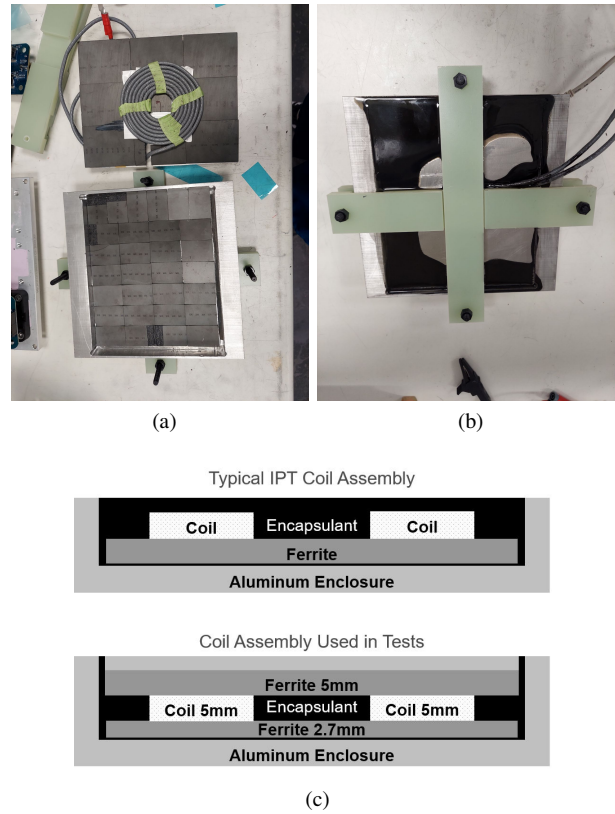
The coil assembly used to verify the compressive stress effect of the Aremco-Bond 2315 epoxy on the ferrite hysteresis loss. (a) Top and bottom parts of the assembly. (b) The cured assembly. (c) Diagram of a typical IPT coil assembly and the small-scale coil assembly of this work.
